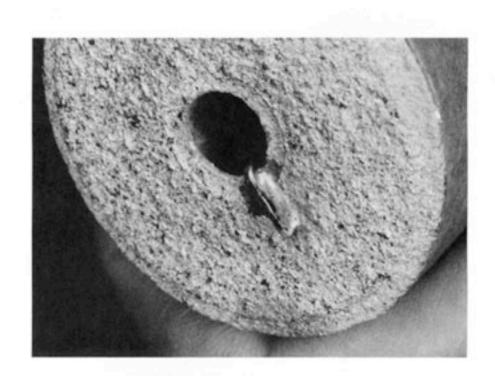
F. The connecting pins on each side of the solder alloy coated concentric wound capacitor "coil" are soldered in parts of a second to these layers.
